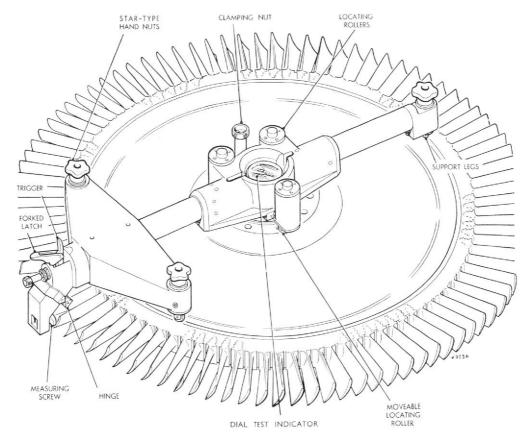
Checking gauge T.79527 in position on the turbine disc.
